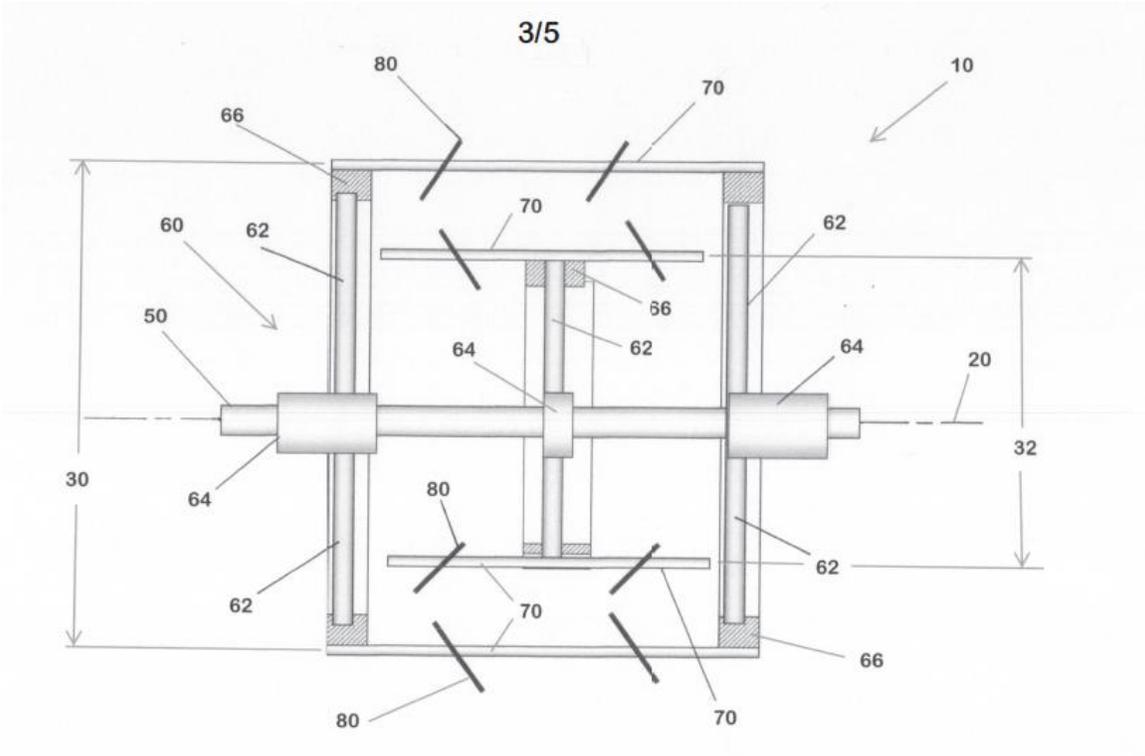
Suggested Axial Flow Helical Bladed Rotor As Shown in FIG 1b
